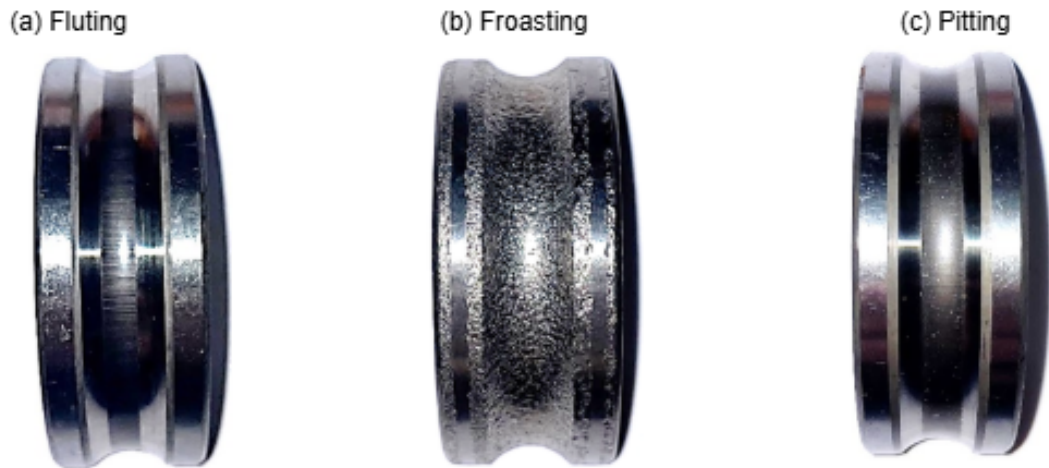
Common Damages caused by Shaft Current[13]:(a) Fluting, (b) Froasting, and (c) Pitting
